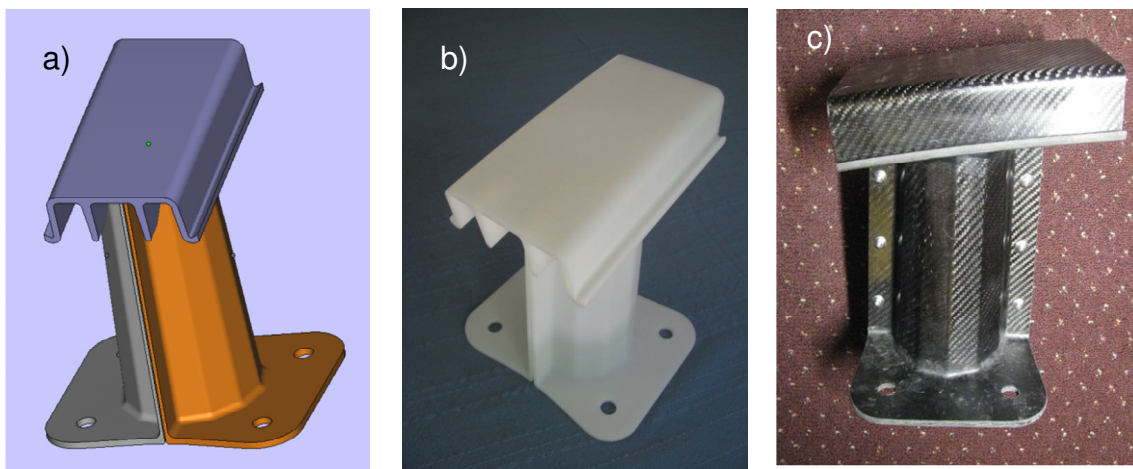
Three versions of the FB-CC joint used in this project, a) CAD design, b) SLS 3-D nylon prototype, and c) carbon-composite section used in a CT scan.
